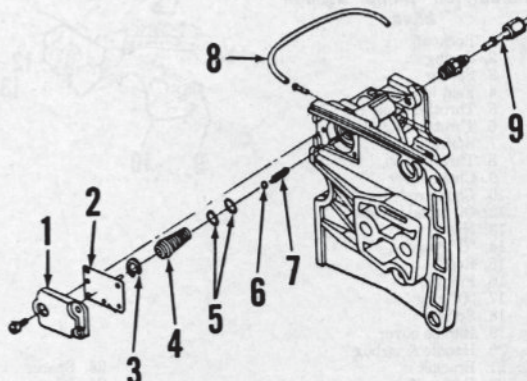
Exploded view of automatic oil pump used on Models 450, 450W, 450HG and 450SL.
